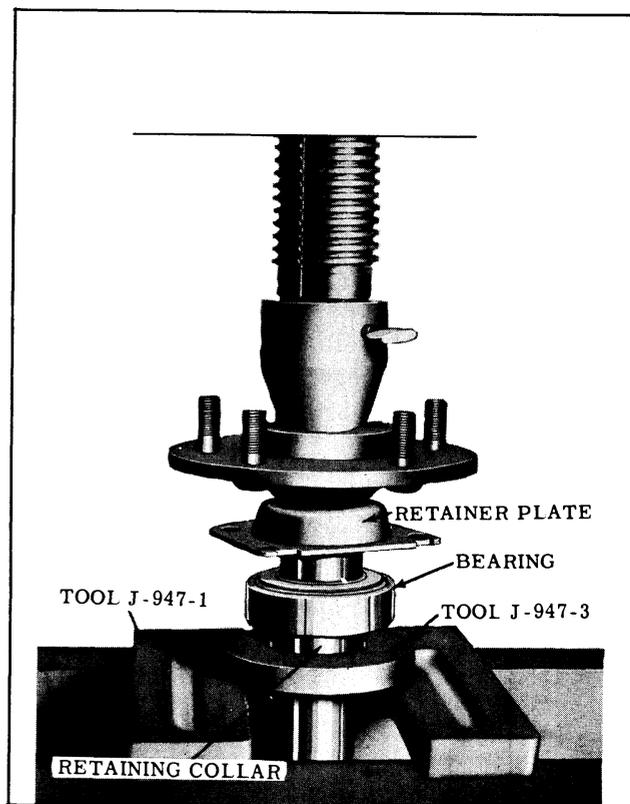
Installing Axle Shaft Bearing Retainer
